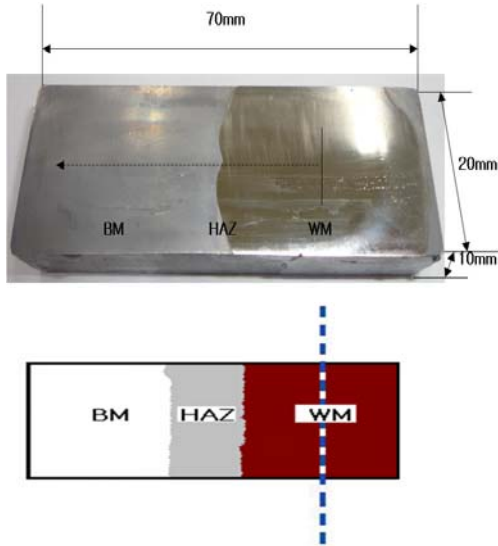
Photographs of the test specimen sample with base metal(BM), heat affected zone(HAZ) and weld metal(WM).
